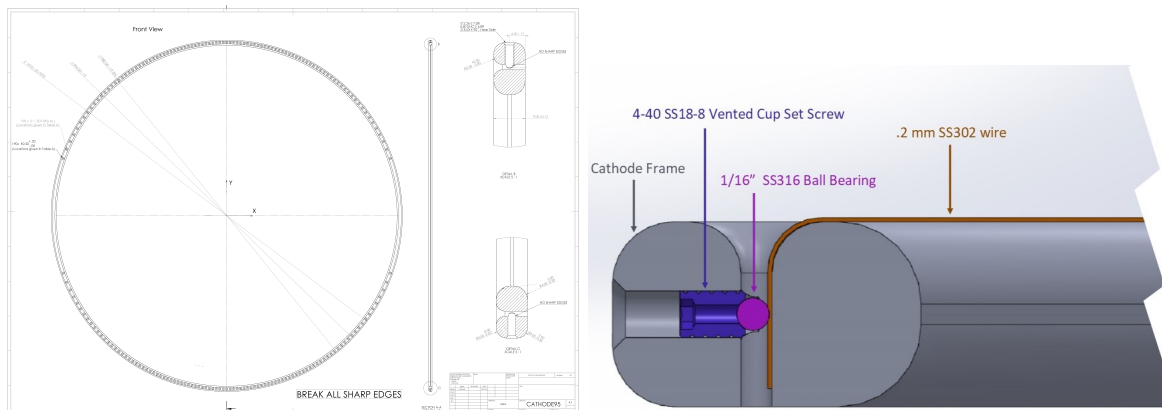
Left: Drawing of the NEXT-100 cathode design; Right: Detail of the wire fixture using set screw and ball bearing.
